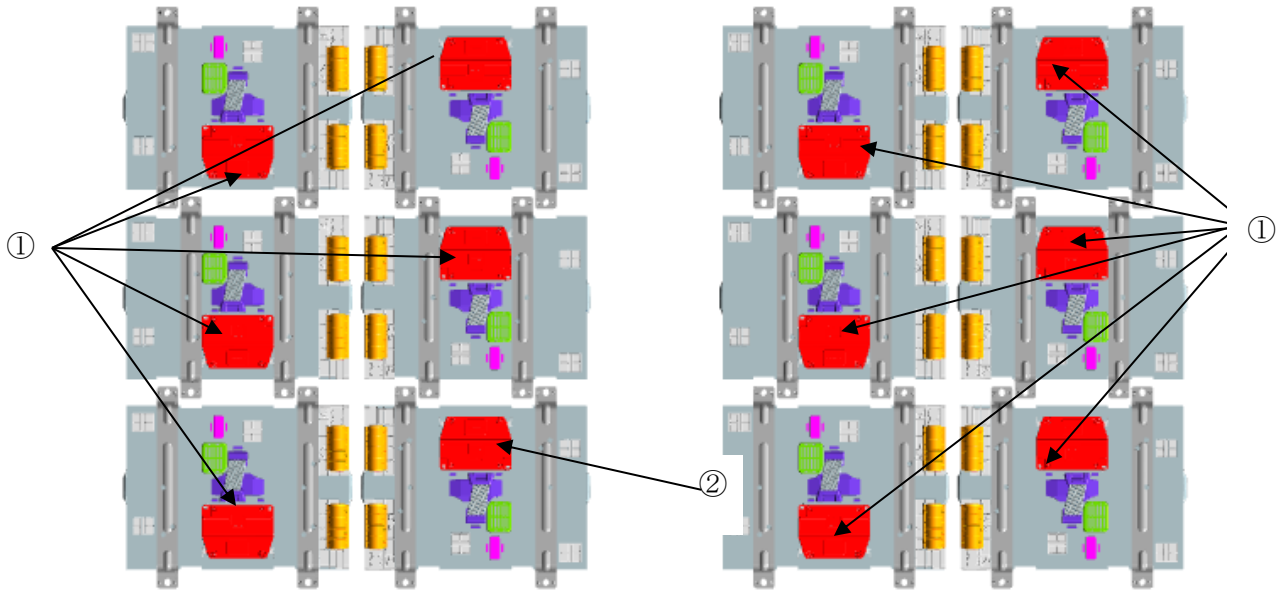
BMS Collector Layout (Underfloor Battery Pack)
